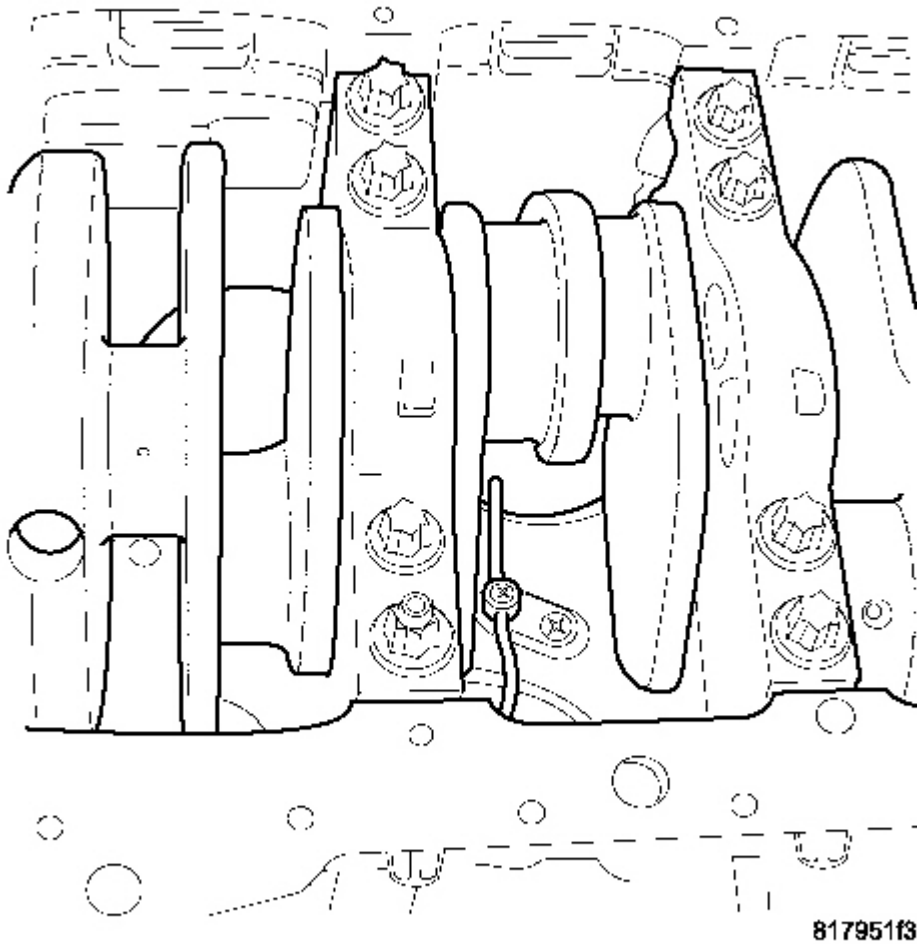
Identifying Crankshaft Main Bearing Caps, Crankshaft, Thrust Washer & Crankshaft Bearings
